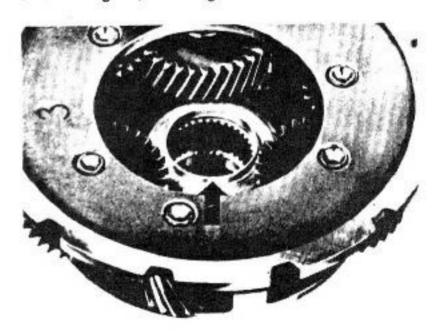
Thrust washer 5 for large sun gear. Shoulder (arrow) should face the small sun gear.
